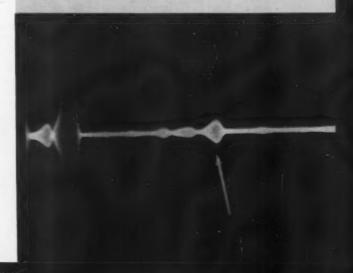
Actual 0.060-in. deep flaw in bolt withdrawn from service shows clearly.
